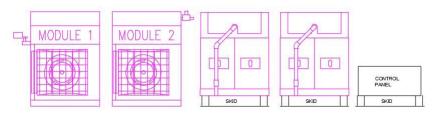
Modular Shipment: Individual Modules are Shipped with the Spray Section/Heat Transfer Section Removed and the Control Panel Removed, and are Connected, Assembled, and Wired On-Site
